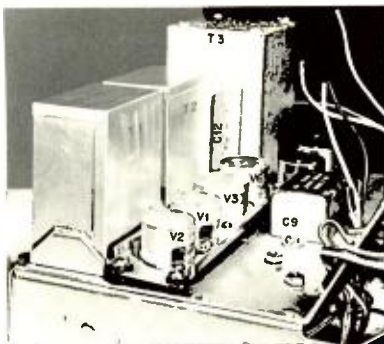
Sockets for low-level tubes are mounted on a channel strip which is flexibly mounted on the chassis to reduce microphonics.
